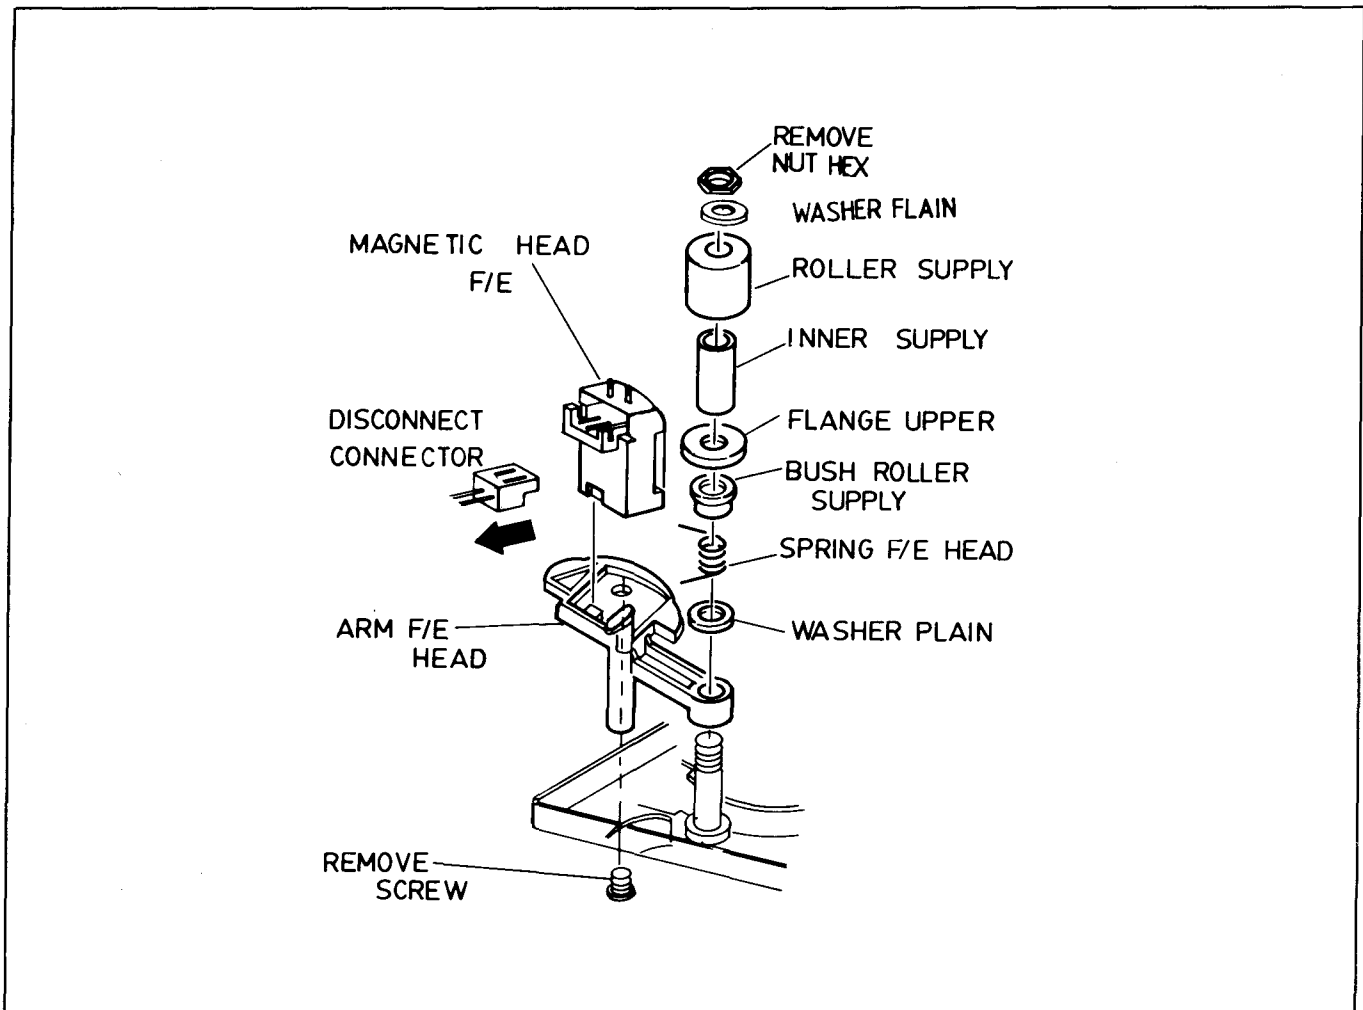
Full Erase (FE) Head/Supply Roller Removal
